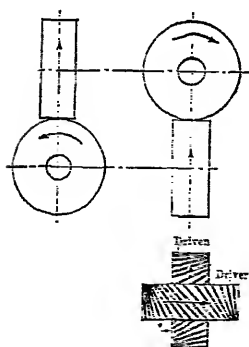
Left-hand spiral gears—clockwise rotation.
